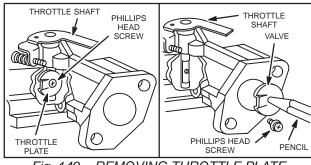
REMOVING THROTTLE PLATE, TYPICAL
